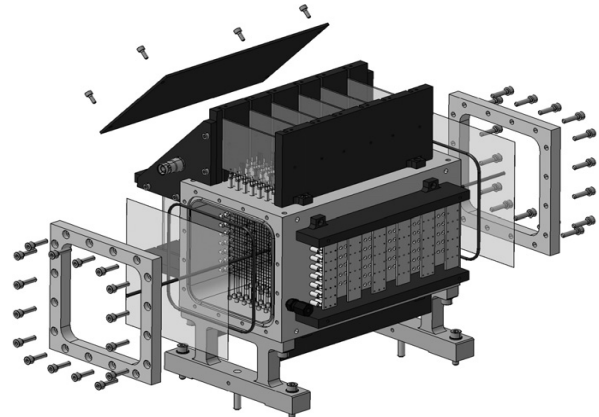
Technical drawing of the Beam Monitor Drift chamber.
